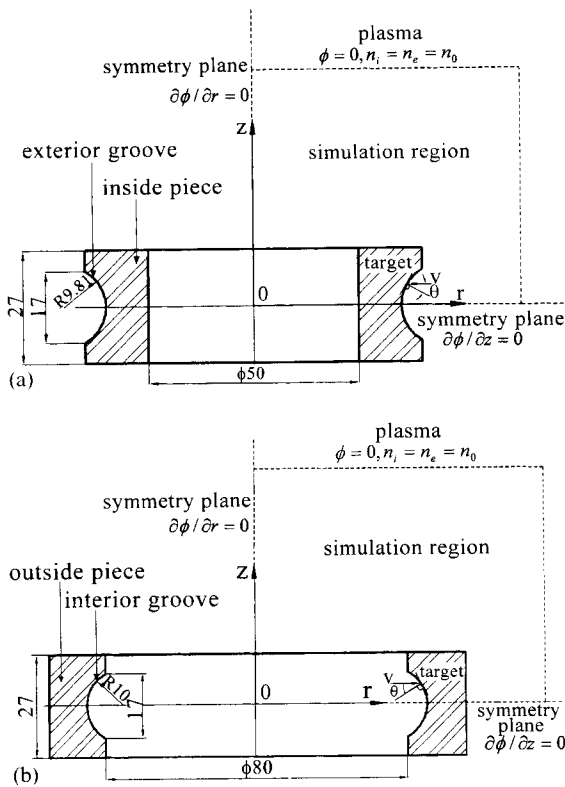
Dimensions (mm) and simulated regions of the (a) inner piece and (b) outer piece of a bearing.
